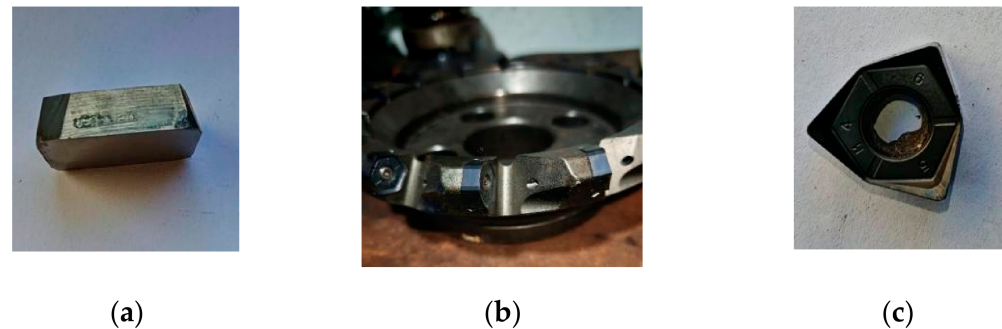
Milling tools used in the experiments: (a) diamond composite material milling cutter; (b) carbide (42CrMo) milling cutter; (c) carbide (tungsten carbide) milling cutter.
